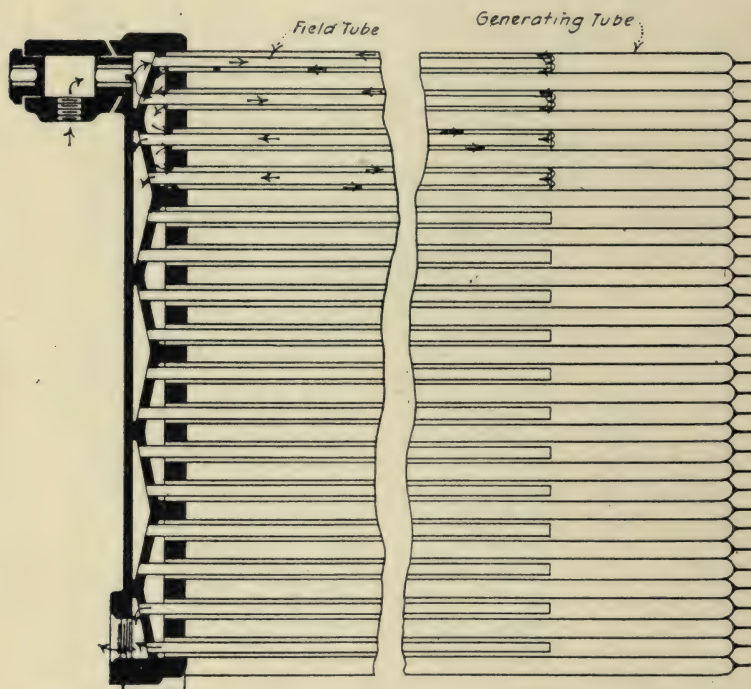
Diagrammatic section through header and tubes of Talbot boiler.
